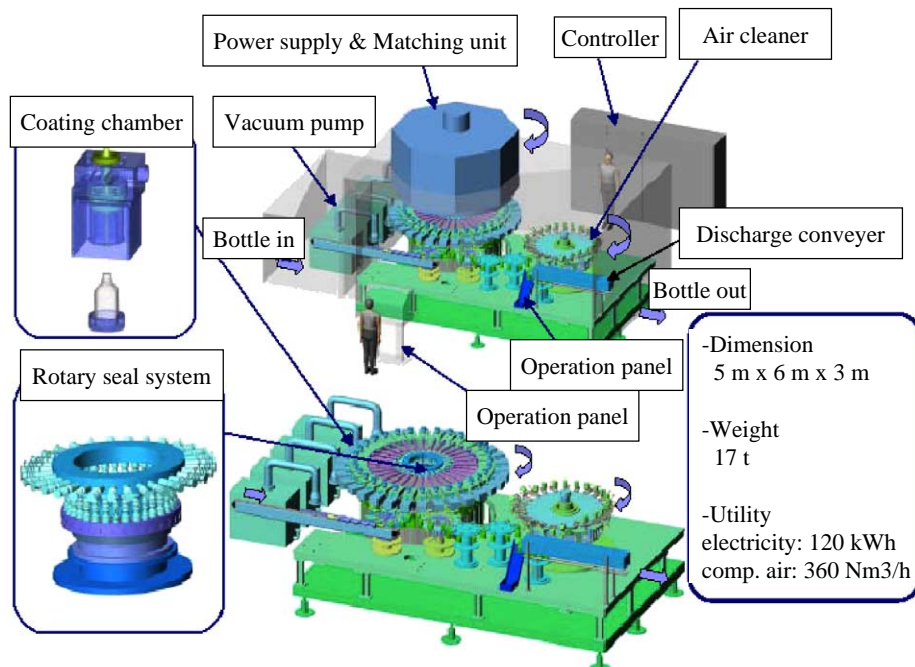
Commercialized DLC coating machine for PET bottles. The machine components and arrangement are shown schematically for ease. The actual system coats 18000 PET bottles per hour.
